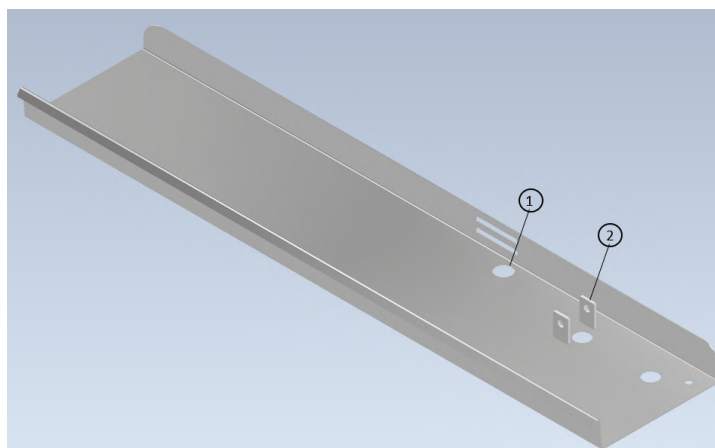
1) Opening for the cables and 2) pneumatic cylinder location
